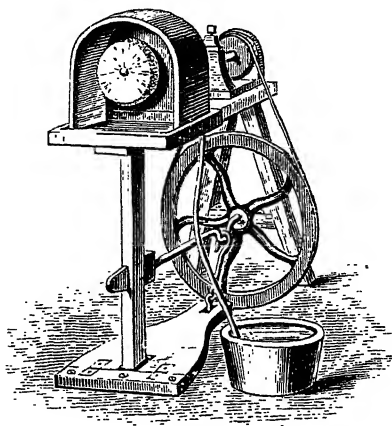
FOOT-POWER SCRATCH-BRUSH LATHE.
